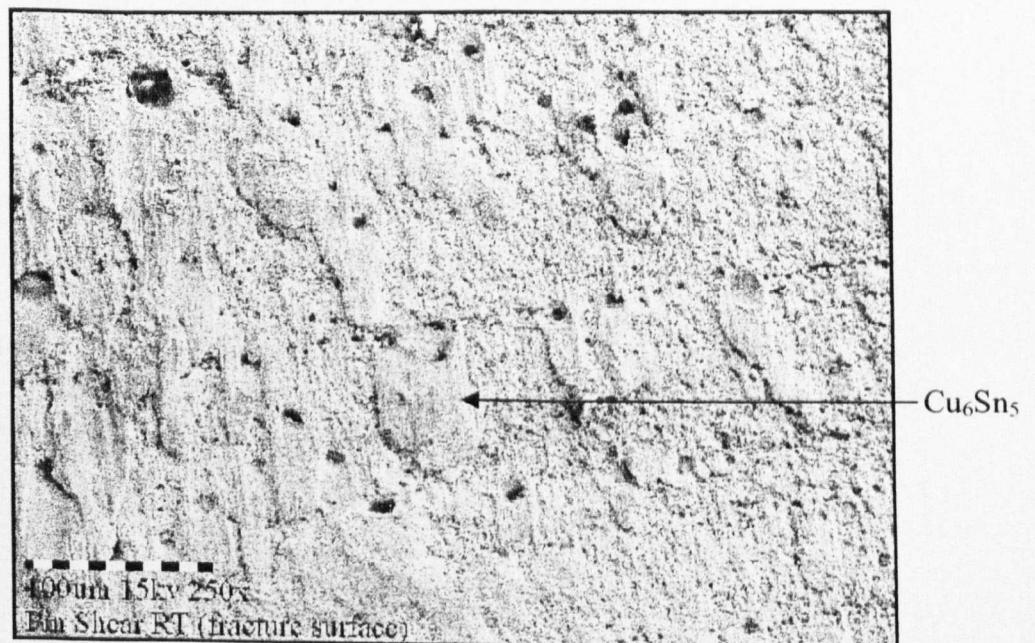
Model joint sheared fracture surface (pin side), showing areas of Cu_6Sn_5 and matrix material as identified by EDX
